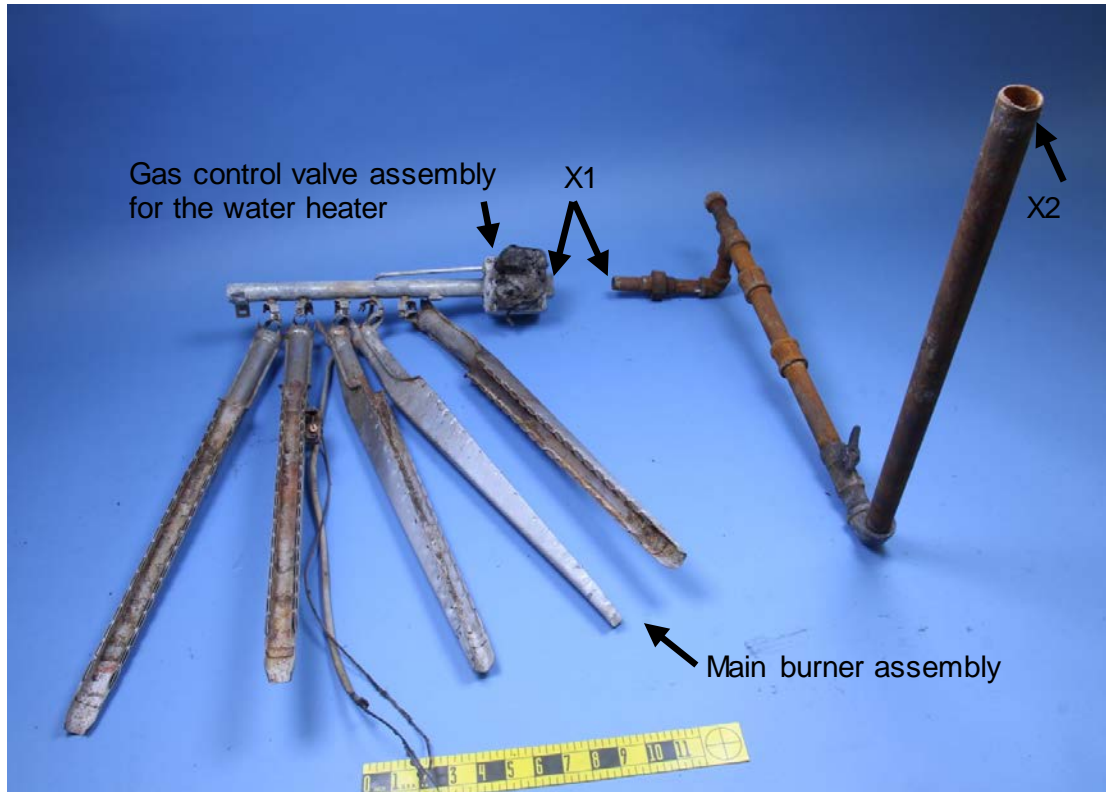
The main burner assembly, including the separated pipe and the gas control valve assembly. The arrows labeled X1 and X2 indicate the pipe segment fractures at the threaded portion.
